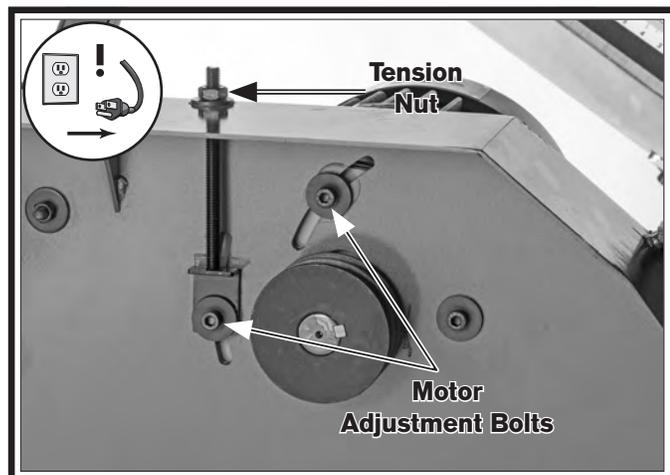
Location of V-belt removal controls (wheel removed for clarity).
